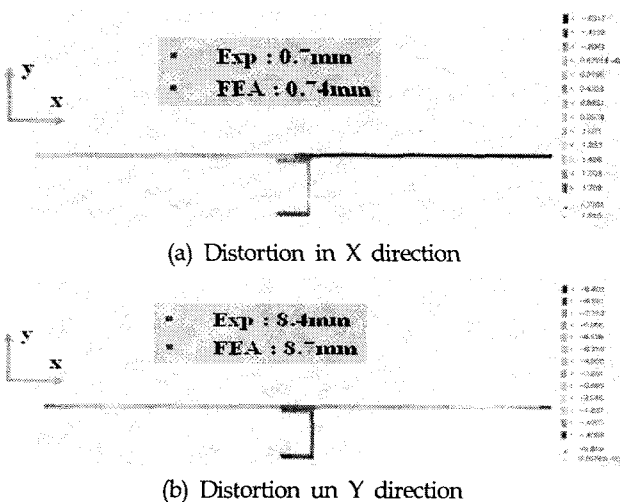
Contours of welding distortion at the channel I butt SA weldment using FEA (unit:mm)
